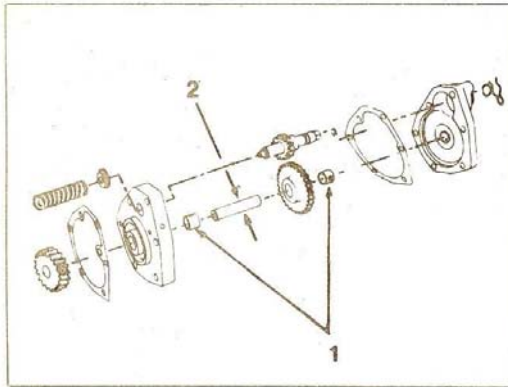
Barring mechanism dimension for two-piece gear cover
